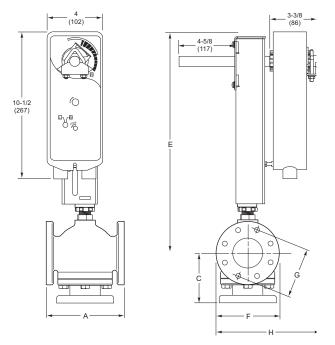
Mx41-715x or Mx41-707x with 2½" to 4" 3-Way VB-9313 Flanged Globe Valve With AV-607-1 Linkage. Mx41-715x with 5" and 6" 3-Way VB-9313 Flanged Globe Valve with AV-609-1 linkage
